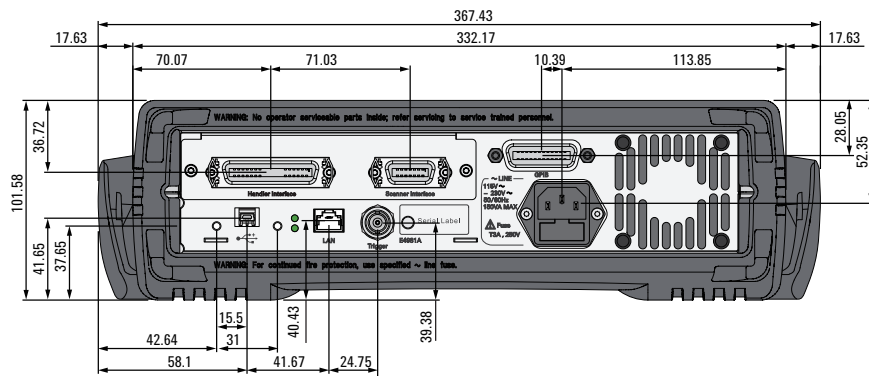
Dimensions (rear view, with handle and bumper, in millimeters, nominal)
